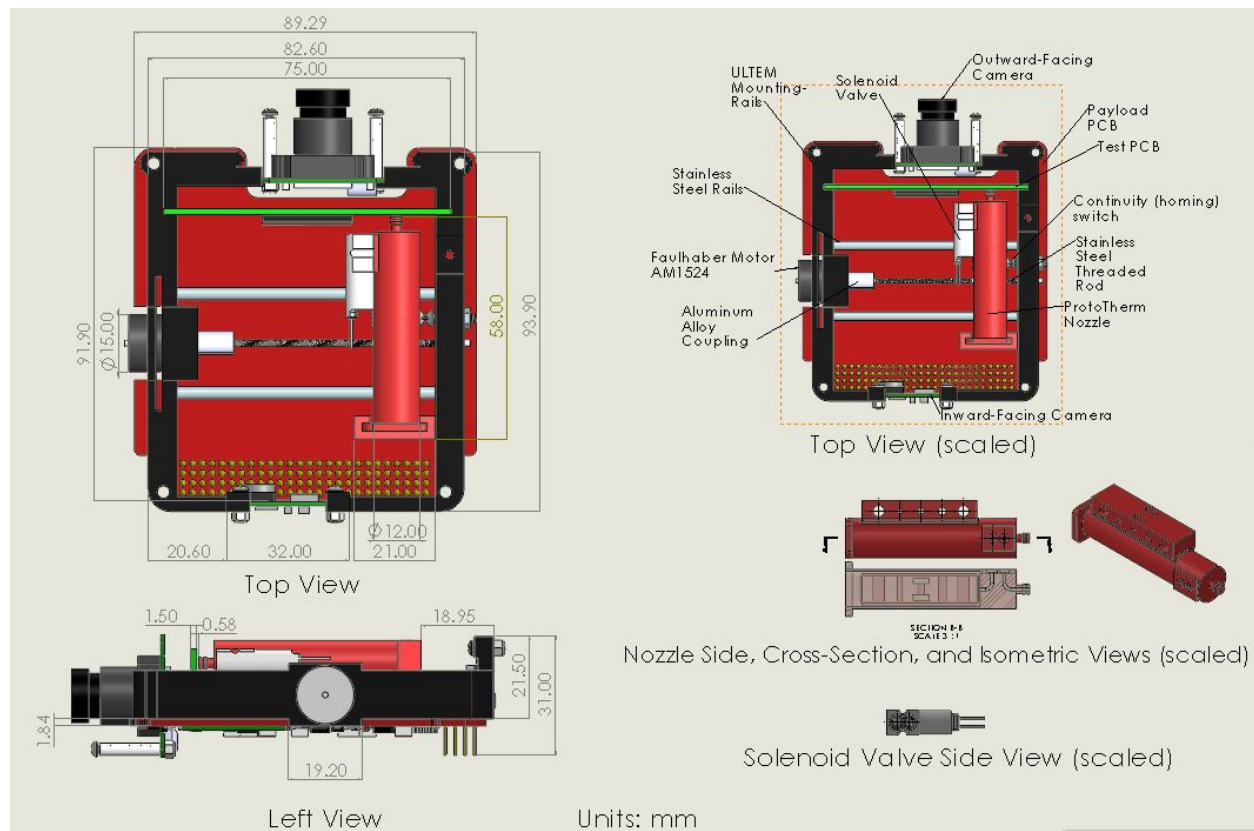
SolidWorks drawing of NC solenoid valve printer integration
